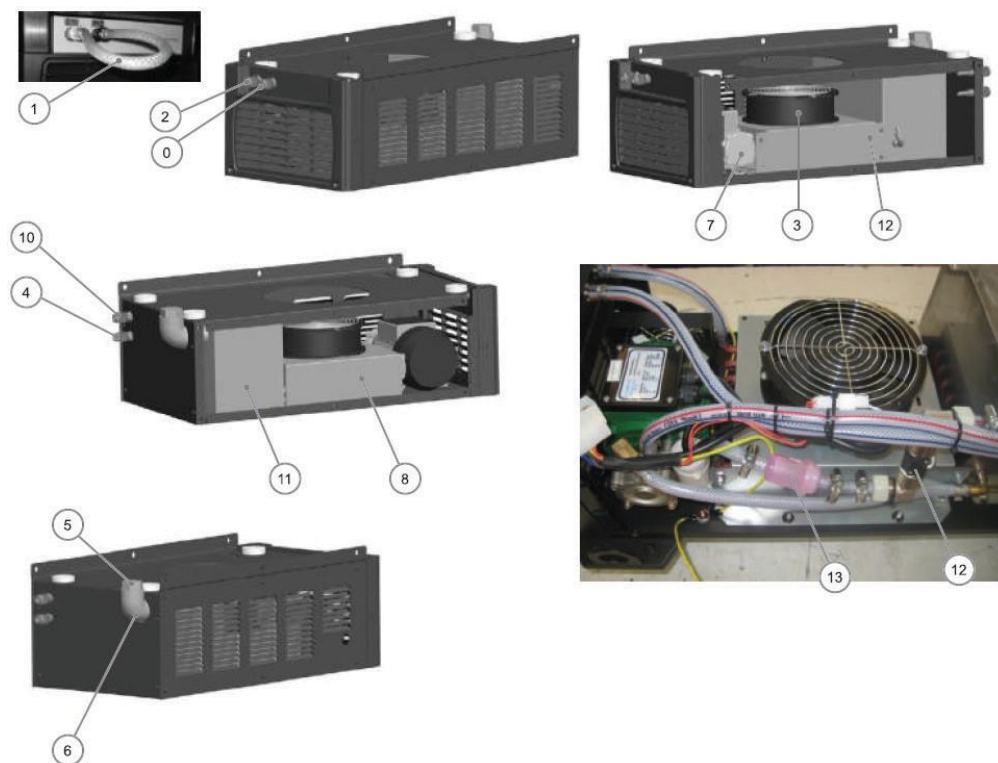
Spare parts for Fanmig 522i Pulse cooling unit
